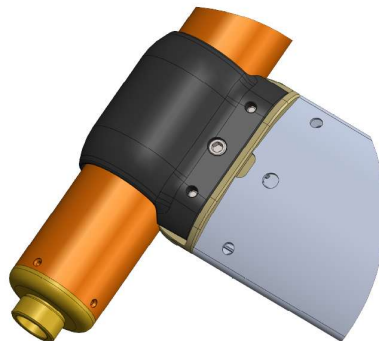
Magnetometer collar clamps contain a single bolt (centered) that requires adjusting when clamping over the tube, and two bolts that attach the collar permanently to the 'wing' that do not require adjusting.
